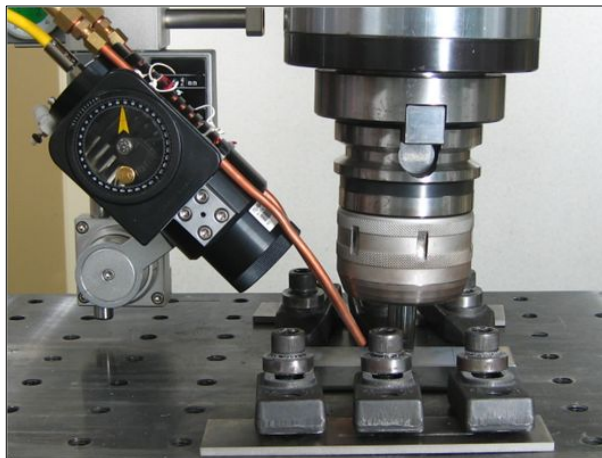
Experimental set-up for laser assisted FSW joint
